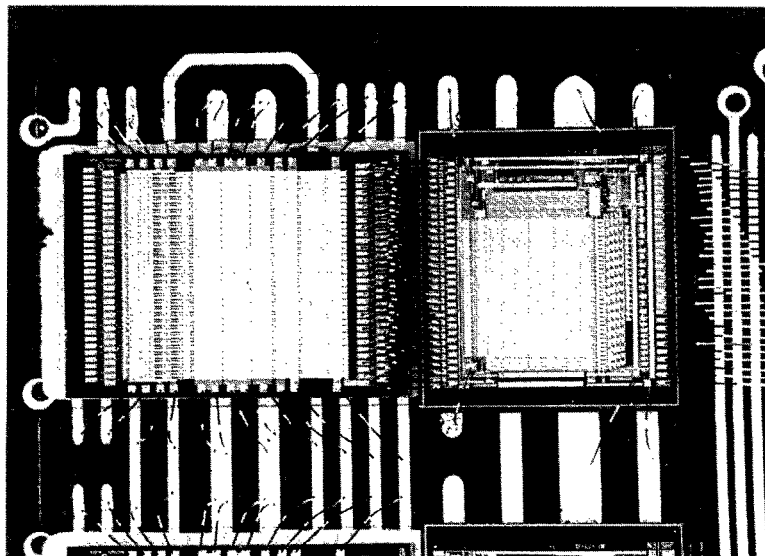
Photograph of the two readout chips, FABRIC and CDP, assembled together on the detector board.
